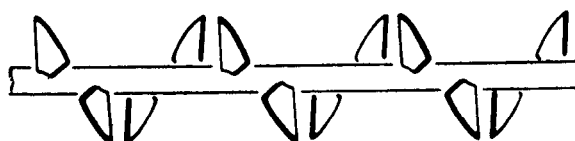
PADDLE TYPE SCREW CONVEYOR
